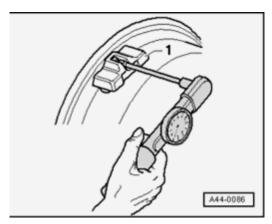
Pressing Wheel Electronics Into Bed And Fasten At Rear Of Valve With Microencapsulated Bolt
